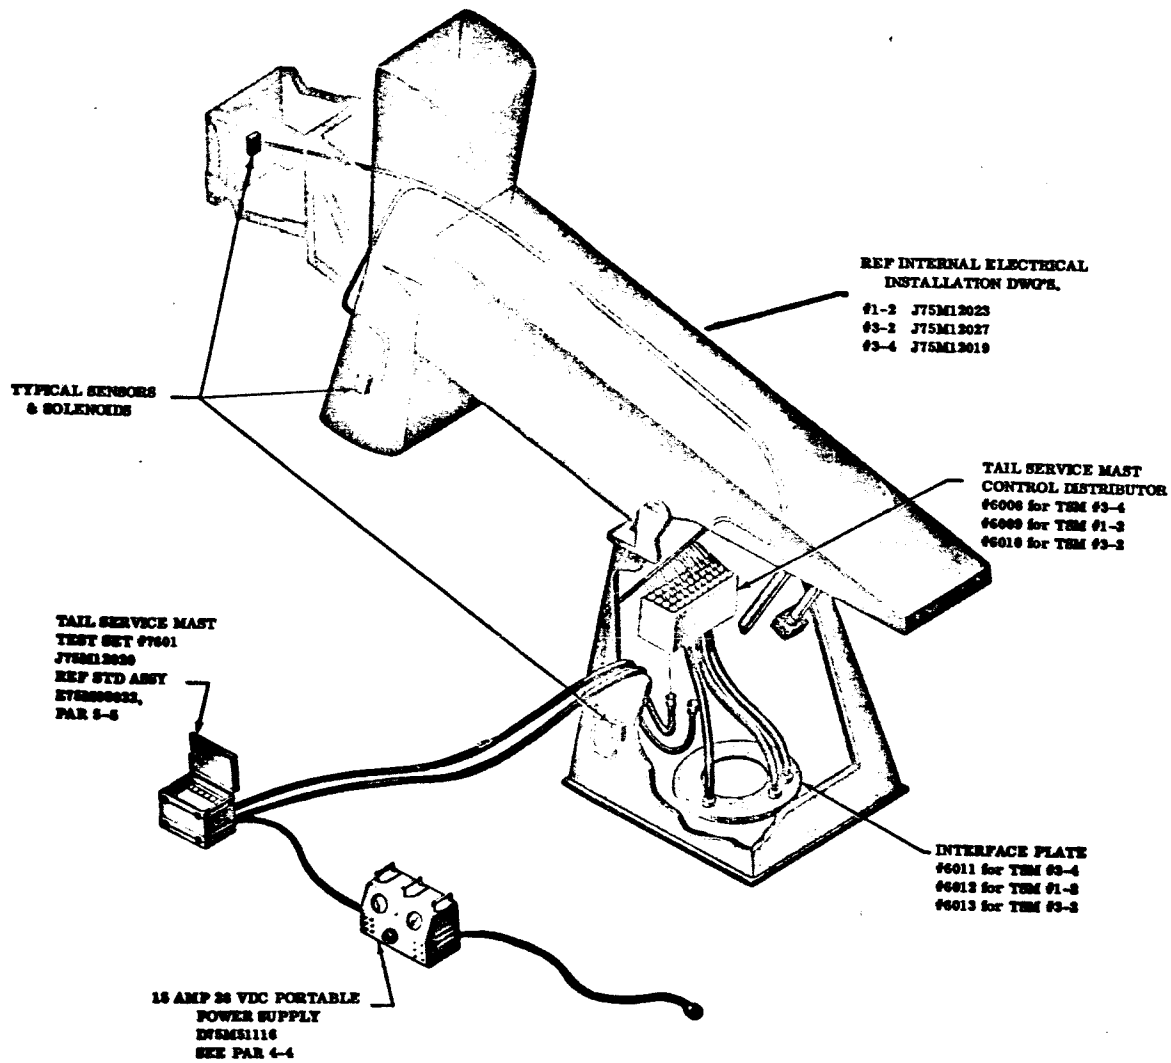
Typical Installation, TSM Test Set E75M12020
